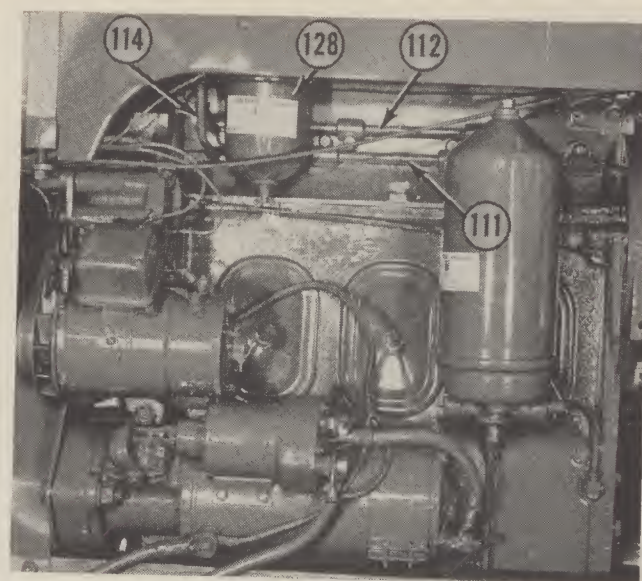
Inlet fuel manifold (111) and outlet fuel manifold (112) are located on right side of cylinder head.
